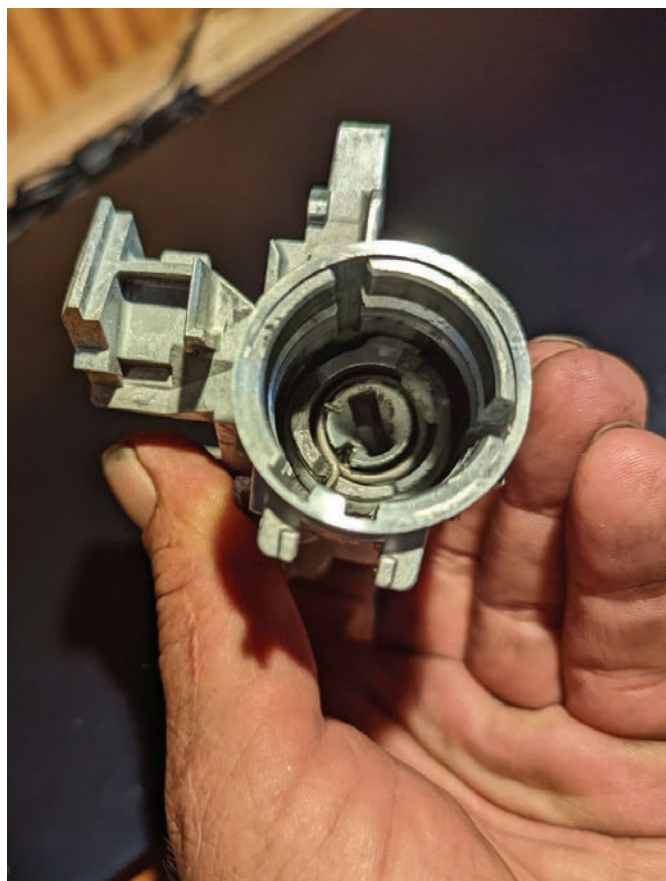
The remaining assembly piece to remove can be seen. There is no need to remove the spring first as you push it out.
